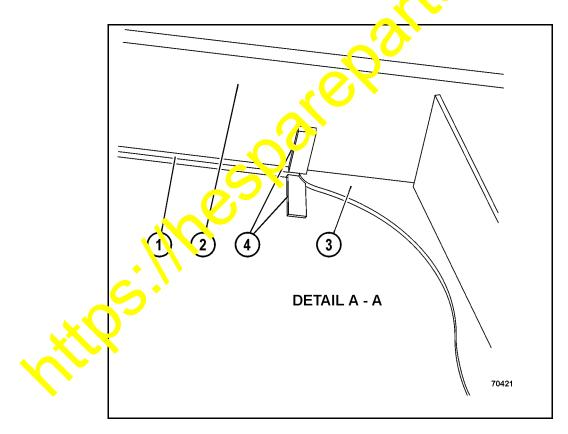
INSIDE VIEW OF THE FRAME RAIL
